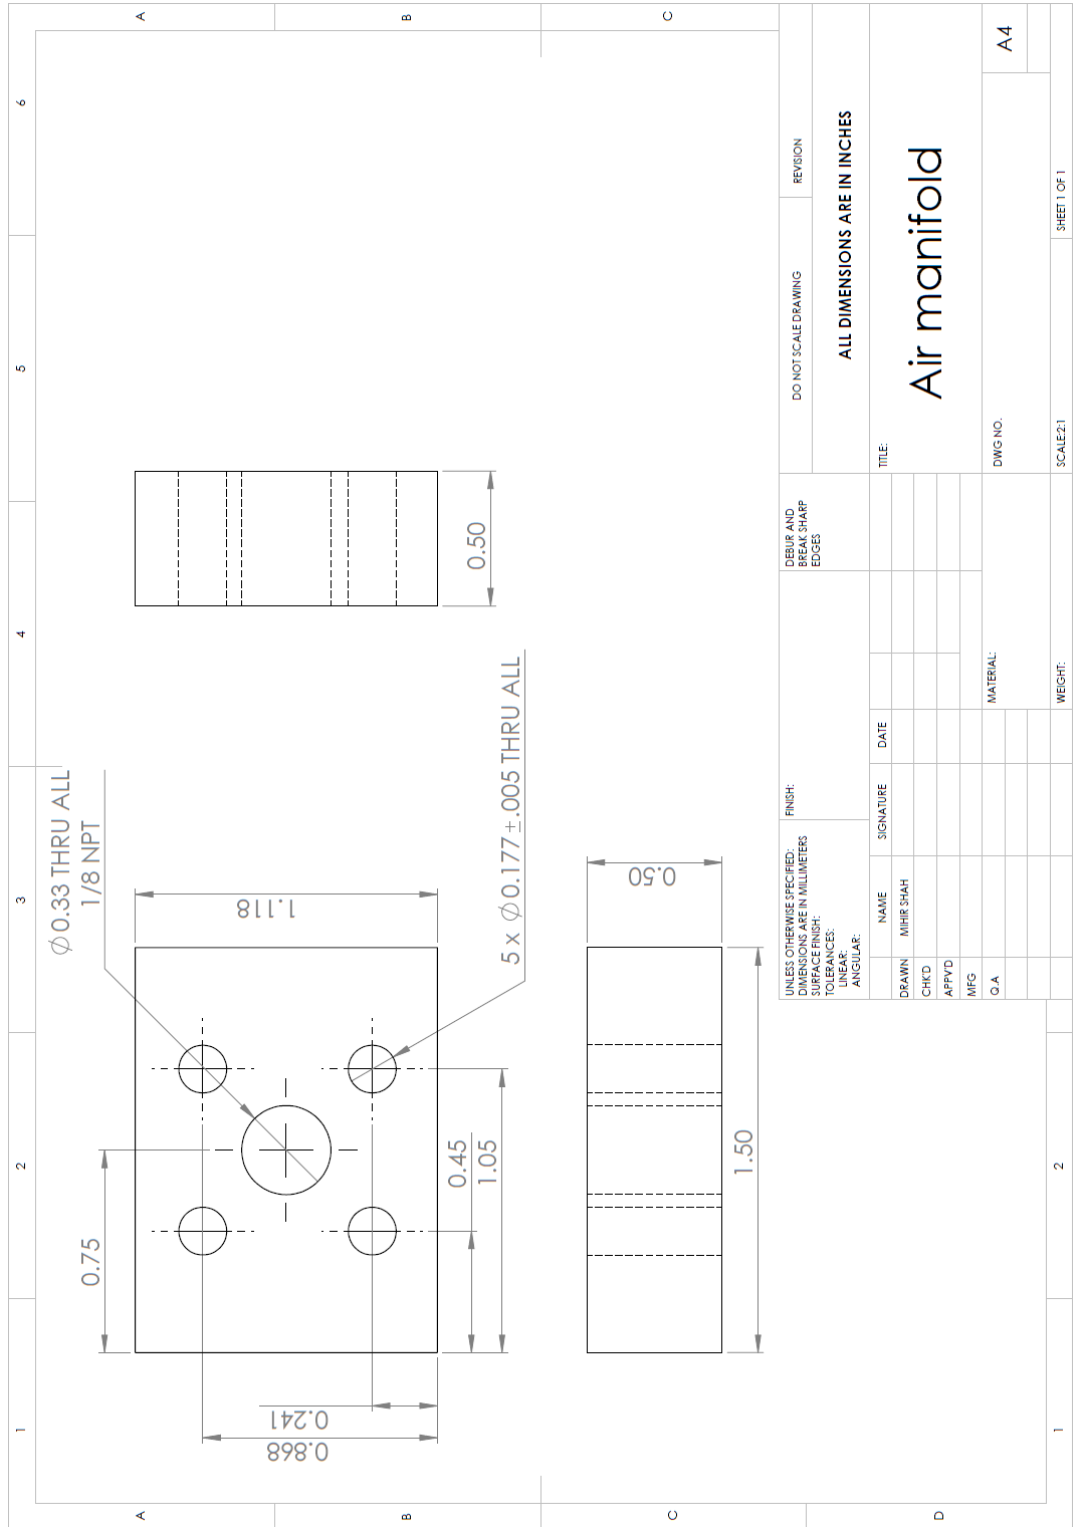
Air Manifold- Engineering Drawing, C1 and C2
